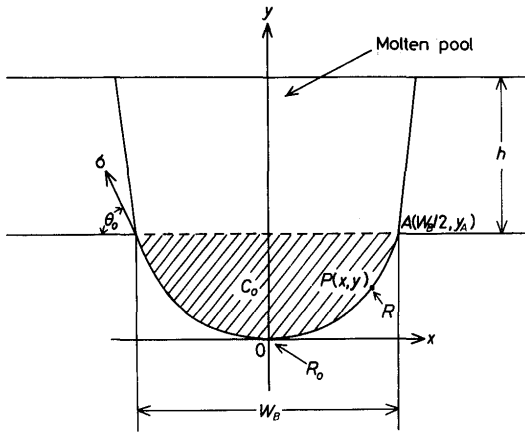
Two-dimensional model of molten pool in full penetration welding<sup>3)</sup>
